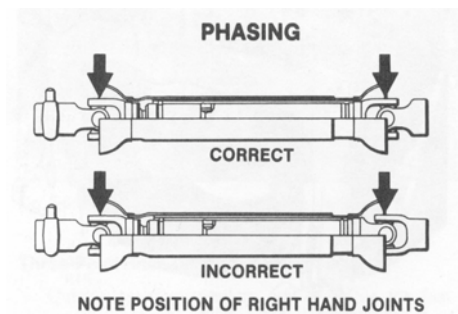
f. The upper portion of the drawing illustrates a correctly placed universal joint. You may wish to check the phasing on a PTO shaft.
